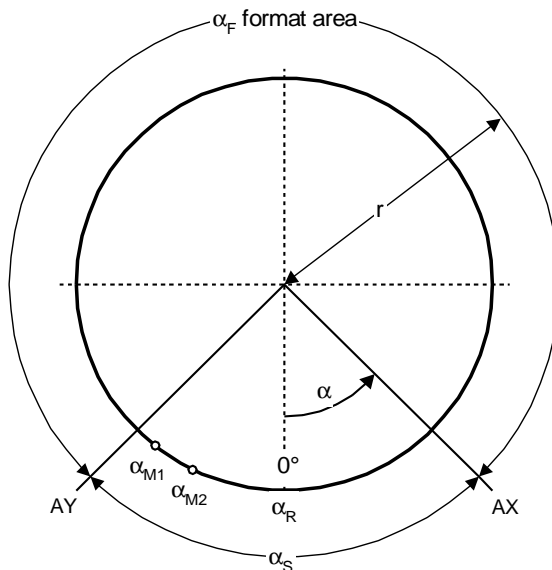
Angular definition for rotating cutting devices (drum-type shears)
